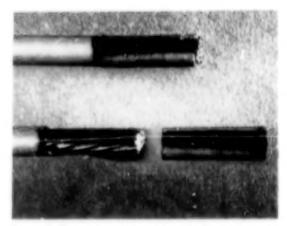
Circumferential and longitudinal cuts made by the laser beam allow the insulation slug to be pulled off of the wire easily. The laser wire stripper makes the two cuts in 1.5 seconds.
